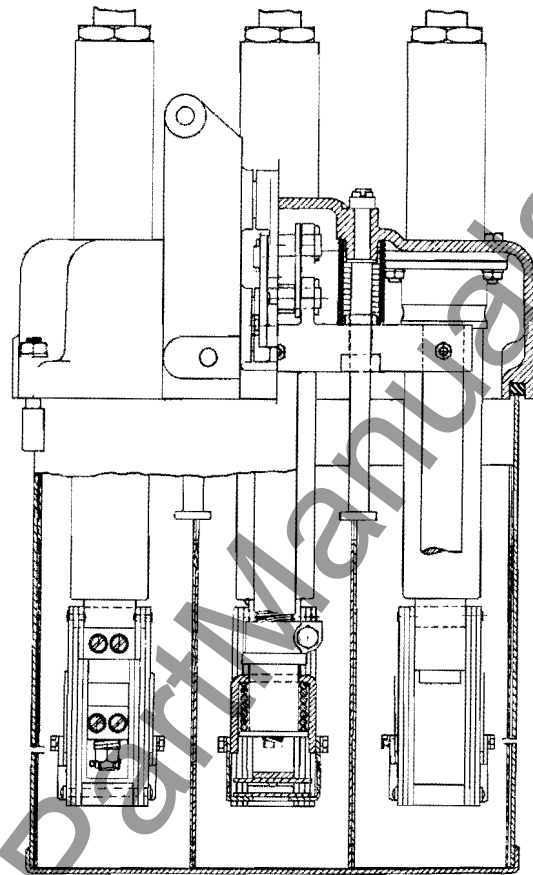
THREE-POLE BREAKER UNIT—FRONT VIEW
